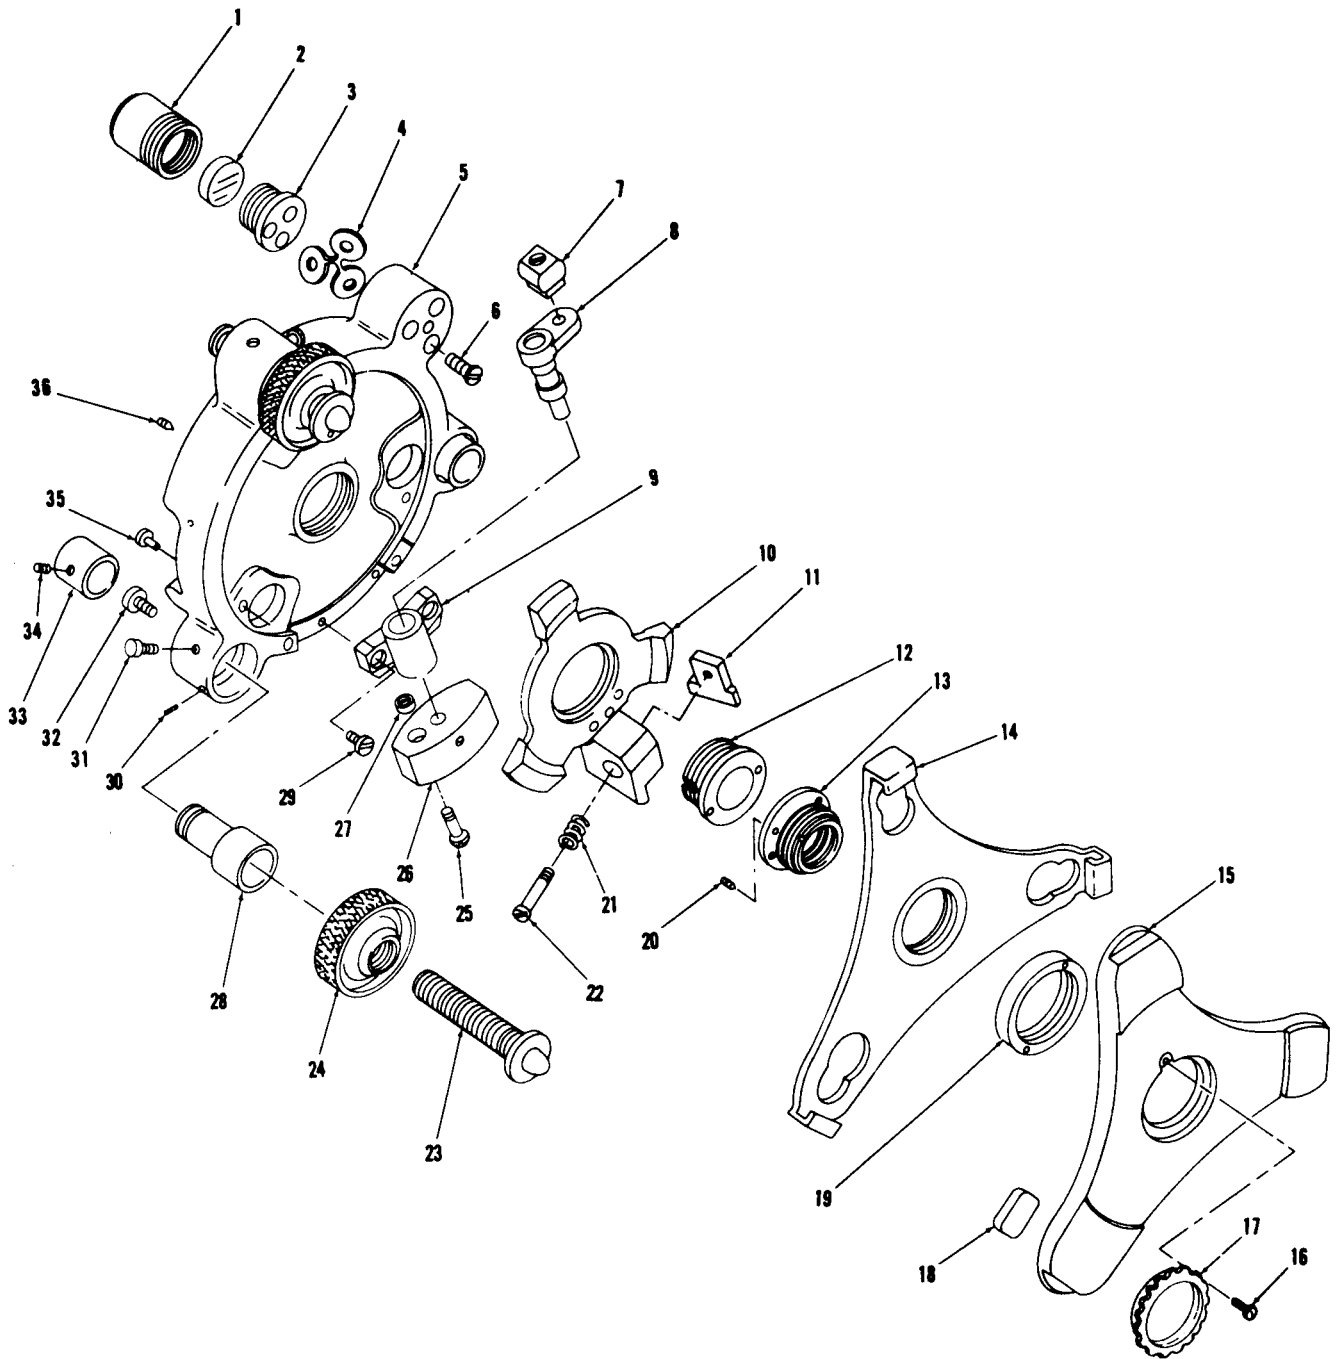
Compass and compass bracket assembly, disassembly and assembly.
